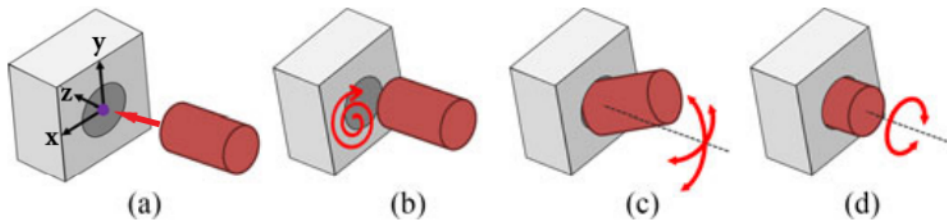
Unit motions for peg-in-hole assembly, retrieved from [13]. (a) Pushing. (b) Rubbing. (c) Wiggling. (d) Screwing.
